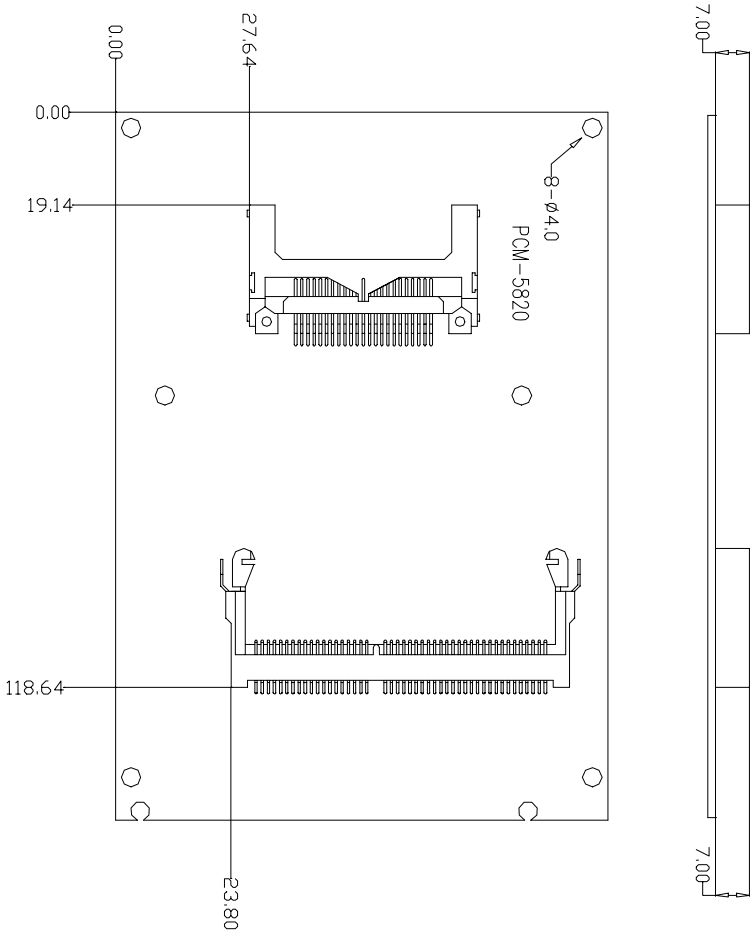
Board Dimensions solder side (PCM-5820 Series)
